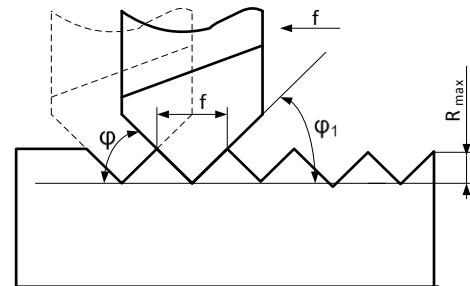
Sketch for machining a surface, not taking into account the radius of cutter tip r
